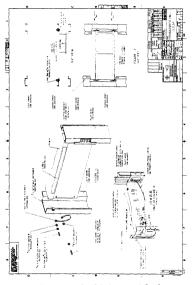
Sample of An Arrangement Drawing (Sheet 4 of 5)
